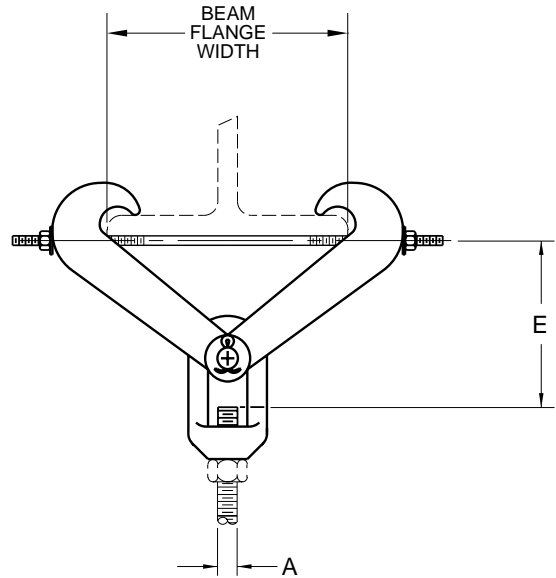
STEEL BEAM CLAMP WITH WELDLESS EYENUT
